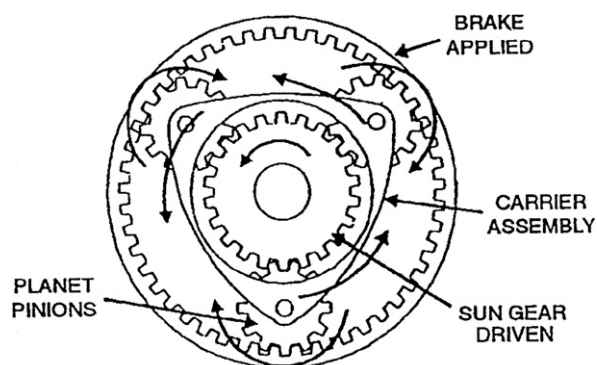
a) • Ring gear fixed sun gear driving (reduction)
